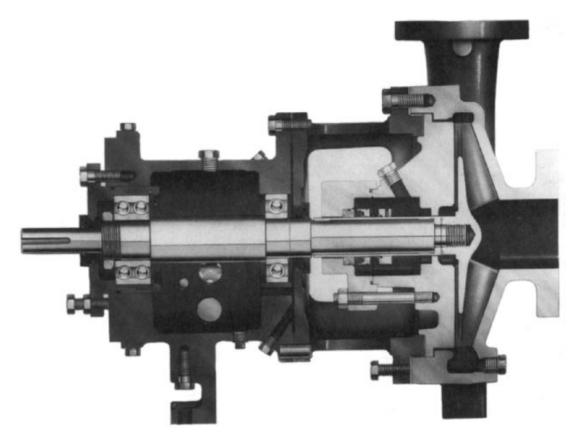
ANSI chemical pump design.(Courtesy of Goulds Pumps, Inc.)
